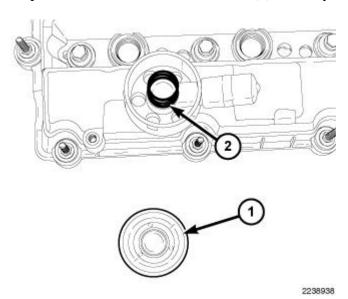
Diaphragm Spring Courtesy of CHRYSLER LLC
